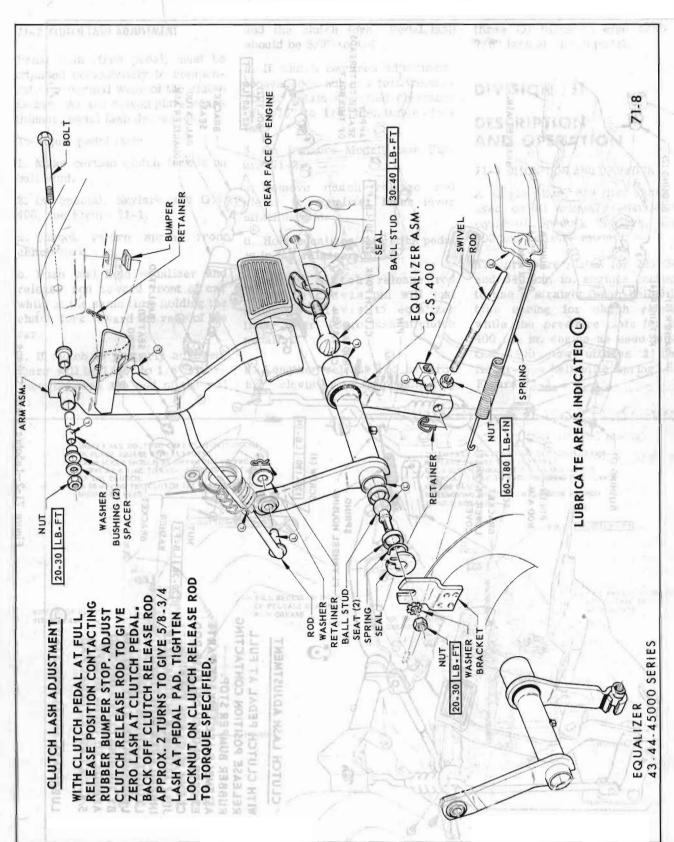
Special, Skylark and G.S. 400 Clutch Linkage
